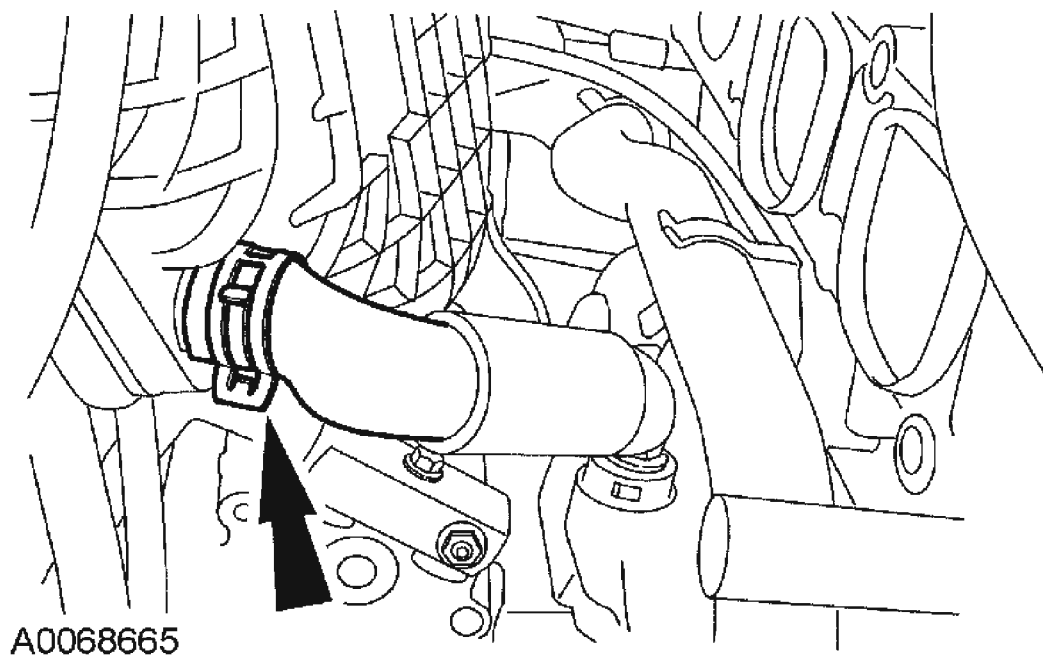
Disconnecting Positive Crankcase Ventilation (PCV) Hose
